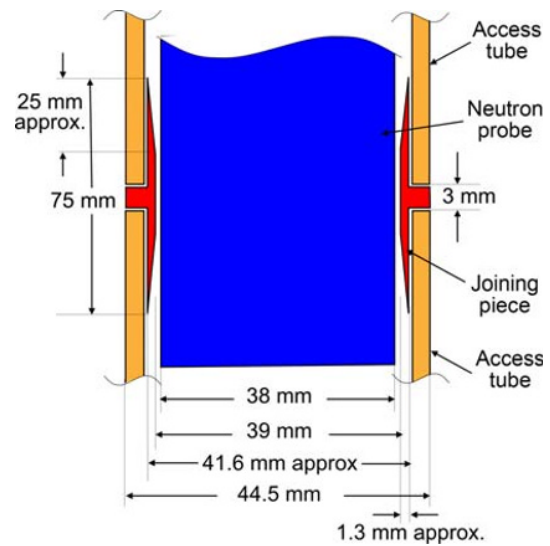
Section through an access tube with an internal joining piece. The angle of the internal bevel is 3° .
